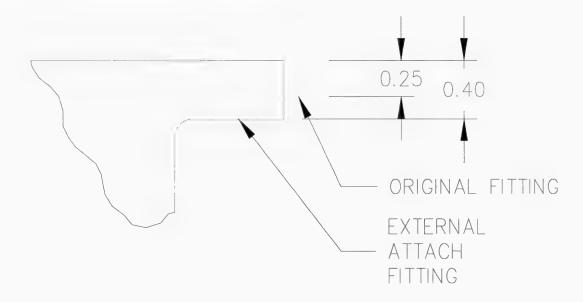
Changed Geometry of Forward Fitting Flanges (Aft Ftg Similar)
